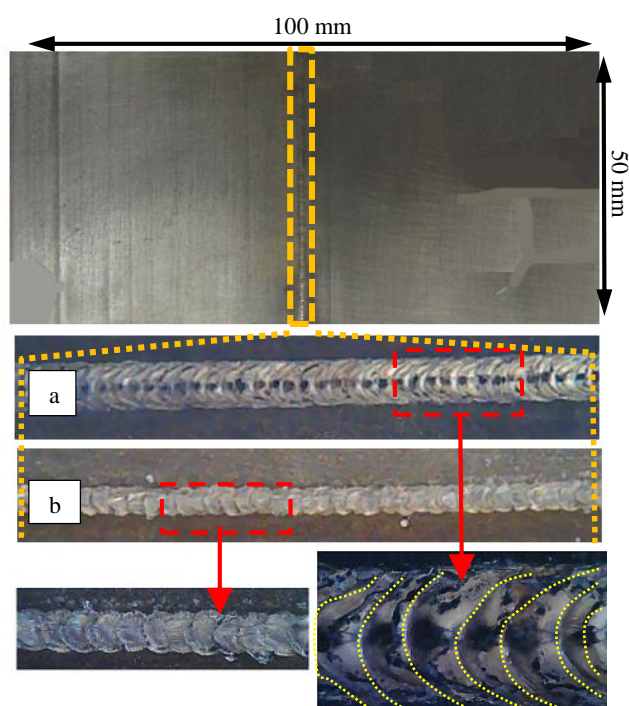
Weld appearance, (a): weld appearance of the top side, (b): weld appearance of the back side.
